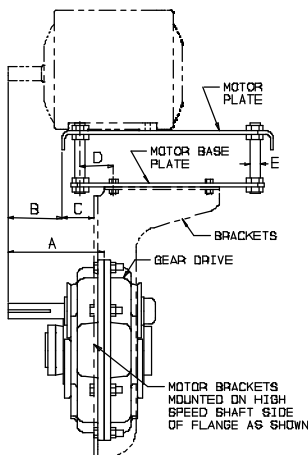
Motor Mount Dimensions (3 o'clock orientation shown above)
